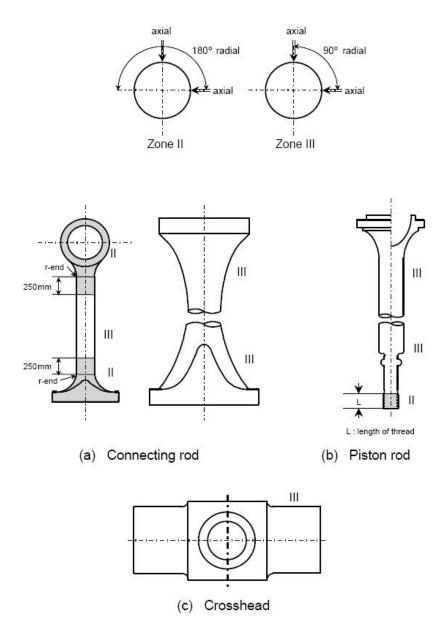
A.5.3(3) Zones for ultrasonic testing on machinery components
